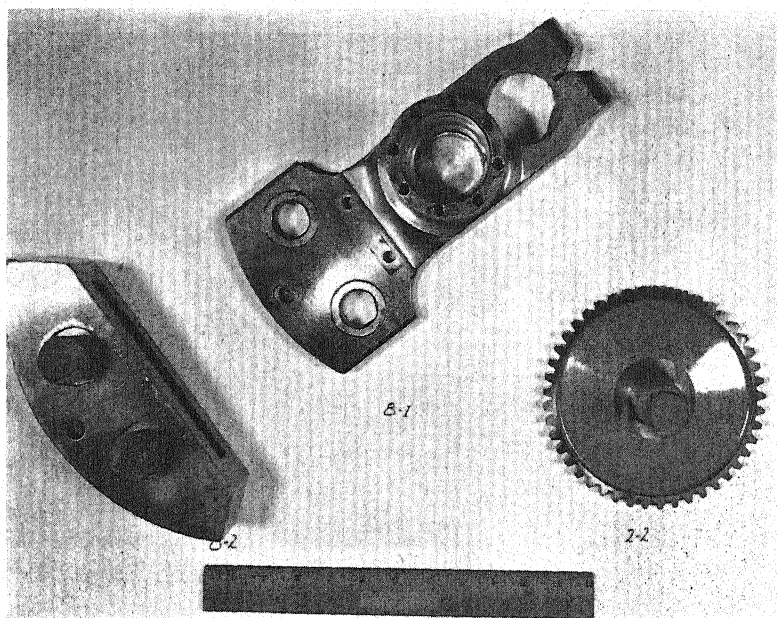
Aircraft Engine Parts Coated with Resin.
